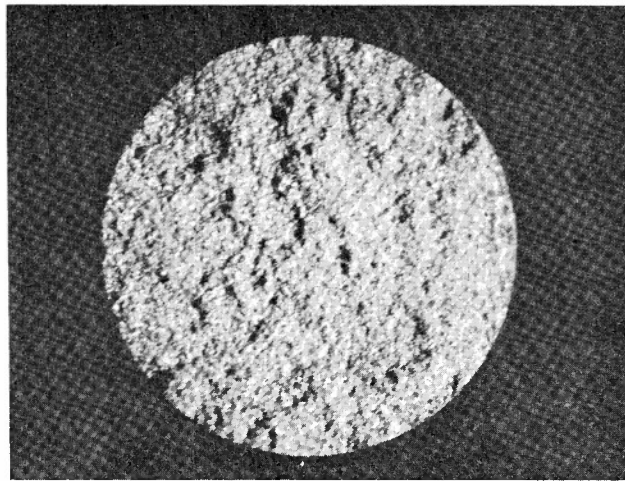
Flick Inspection Results and 10X Black and White Photographs of Fracture Faces of Disparate S6-5, ATJ-S Billet L-16-7
